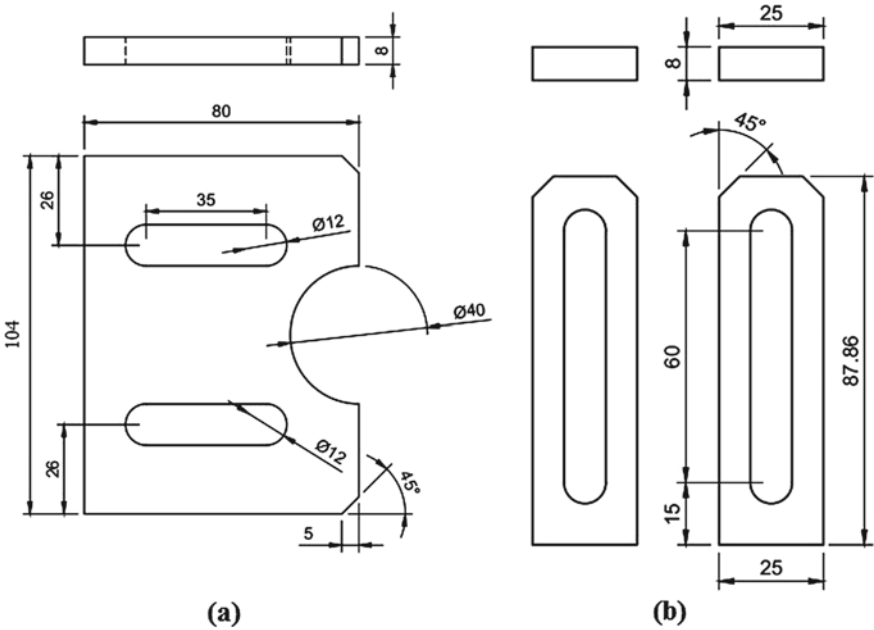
Sliding plate to constraint workpiece movement in a X direction and b Y direction (all dimensions in mm)
